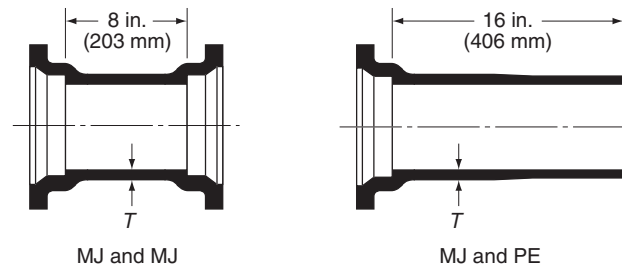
Mechanical-joint connecting pieces (see Table 11)
